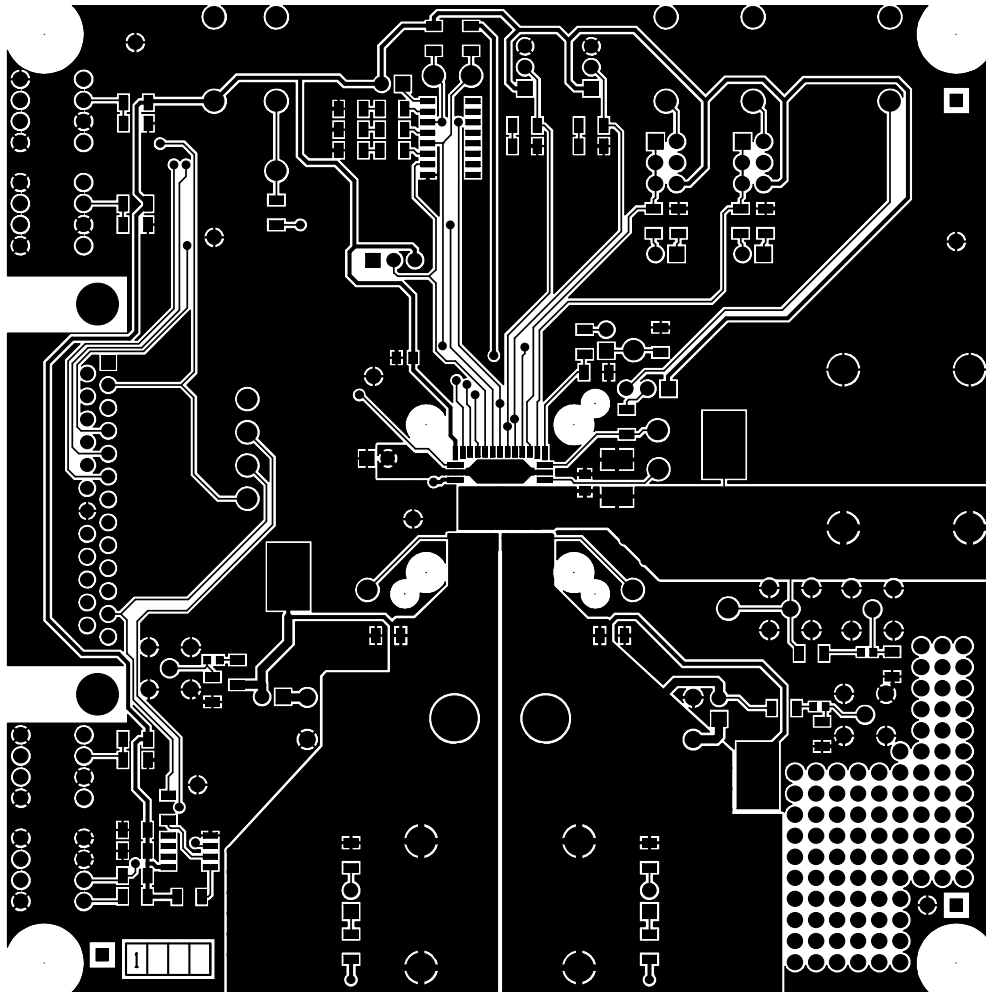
KIT06XS4200EVBE Assembly Layer Top
